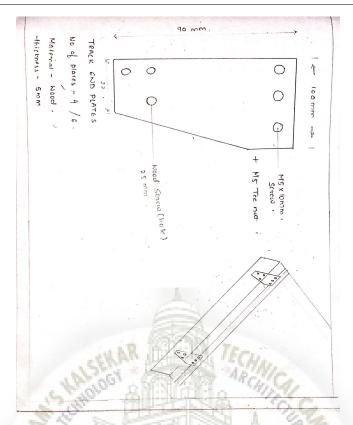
Detail Sketch of Bracket to join Track End plates
